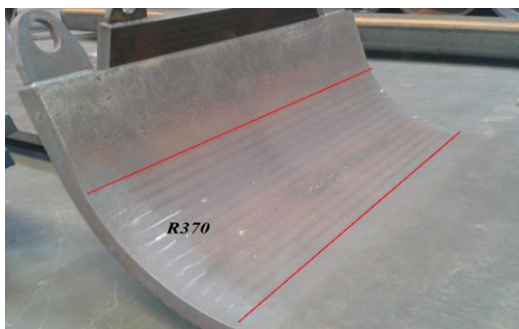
Pre-bending on press machine of the sheet metal ends at a radius R370
